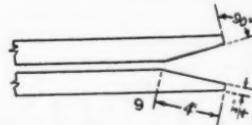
Drawing illustrating method of cutting the ends of return bend tubes for welding.
